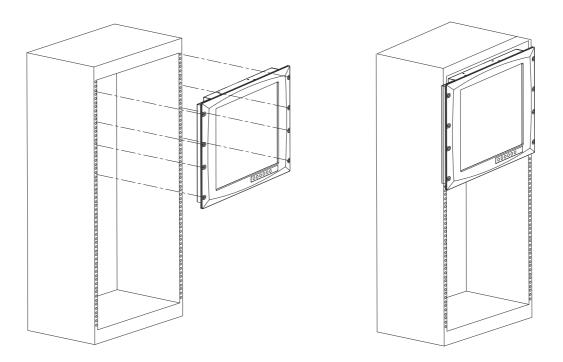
Rack Mounting for FPM-3171G/FPM-3191G
